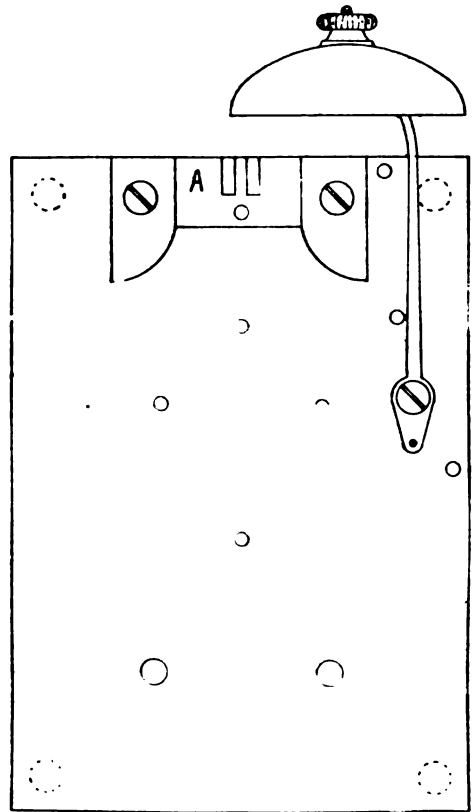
Front or Top Plate of Eight Day English Clock (dial removed).
